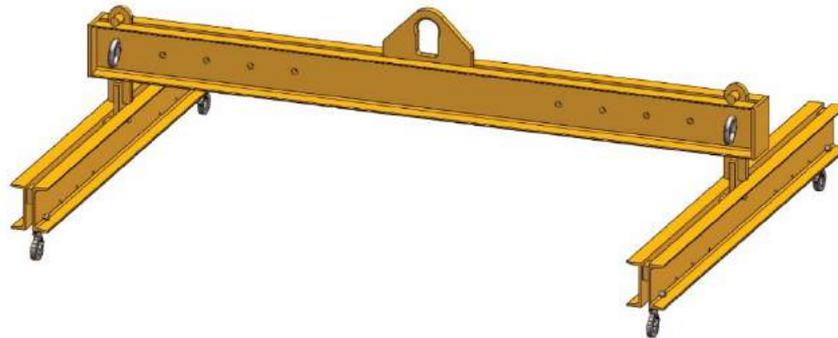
Hatch Cover Lifting Tool (TRI-STATE RIGGING EQUIPMENT n.d.)
